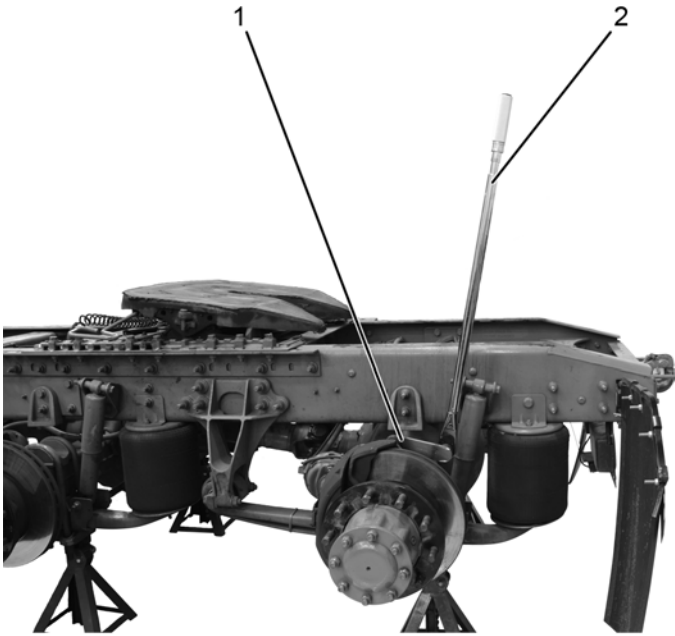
Intermediate and Rear Axle Lower Caliper Mounting Bolts.
